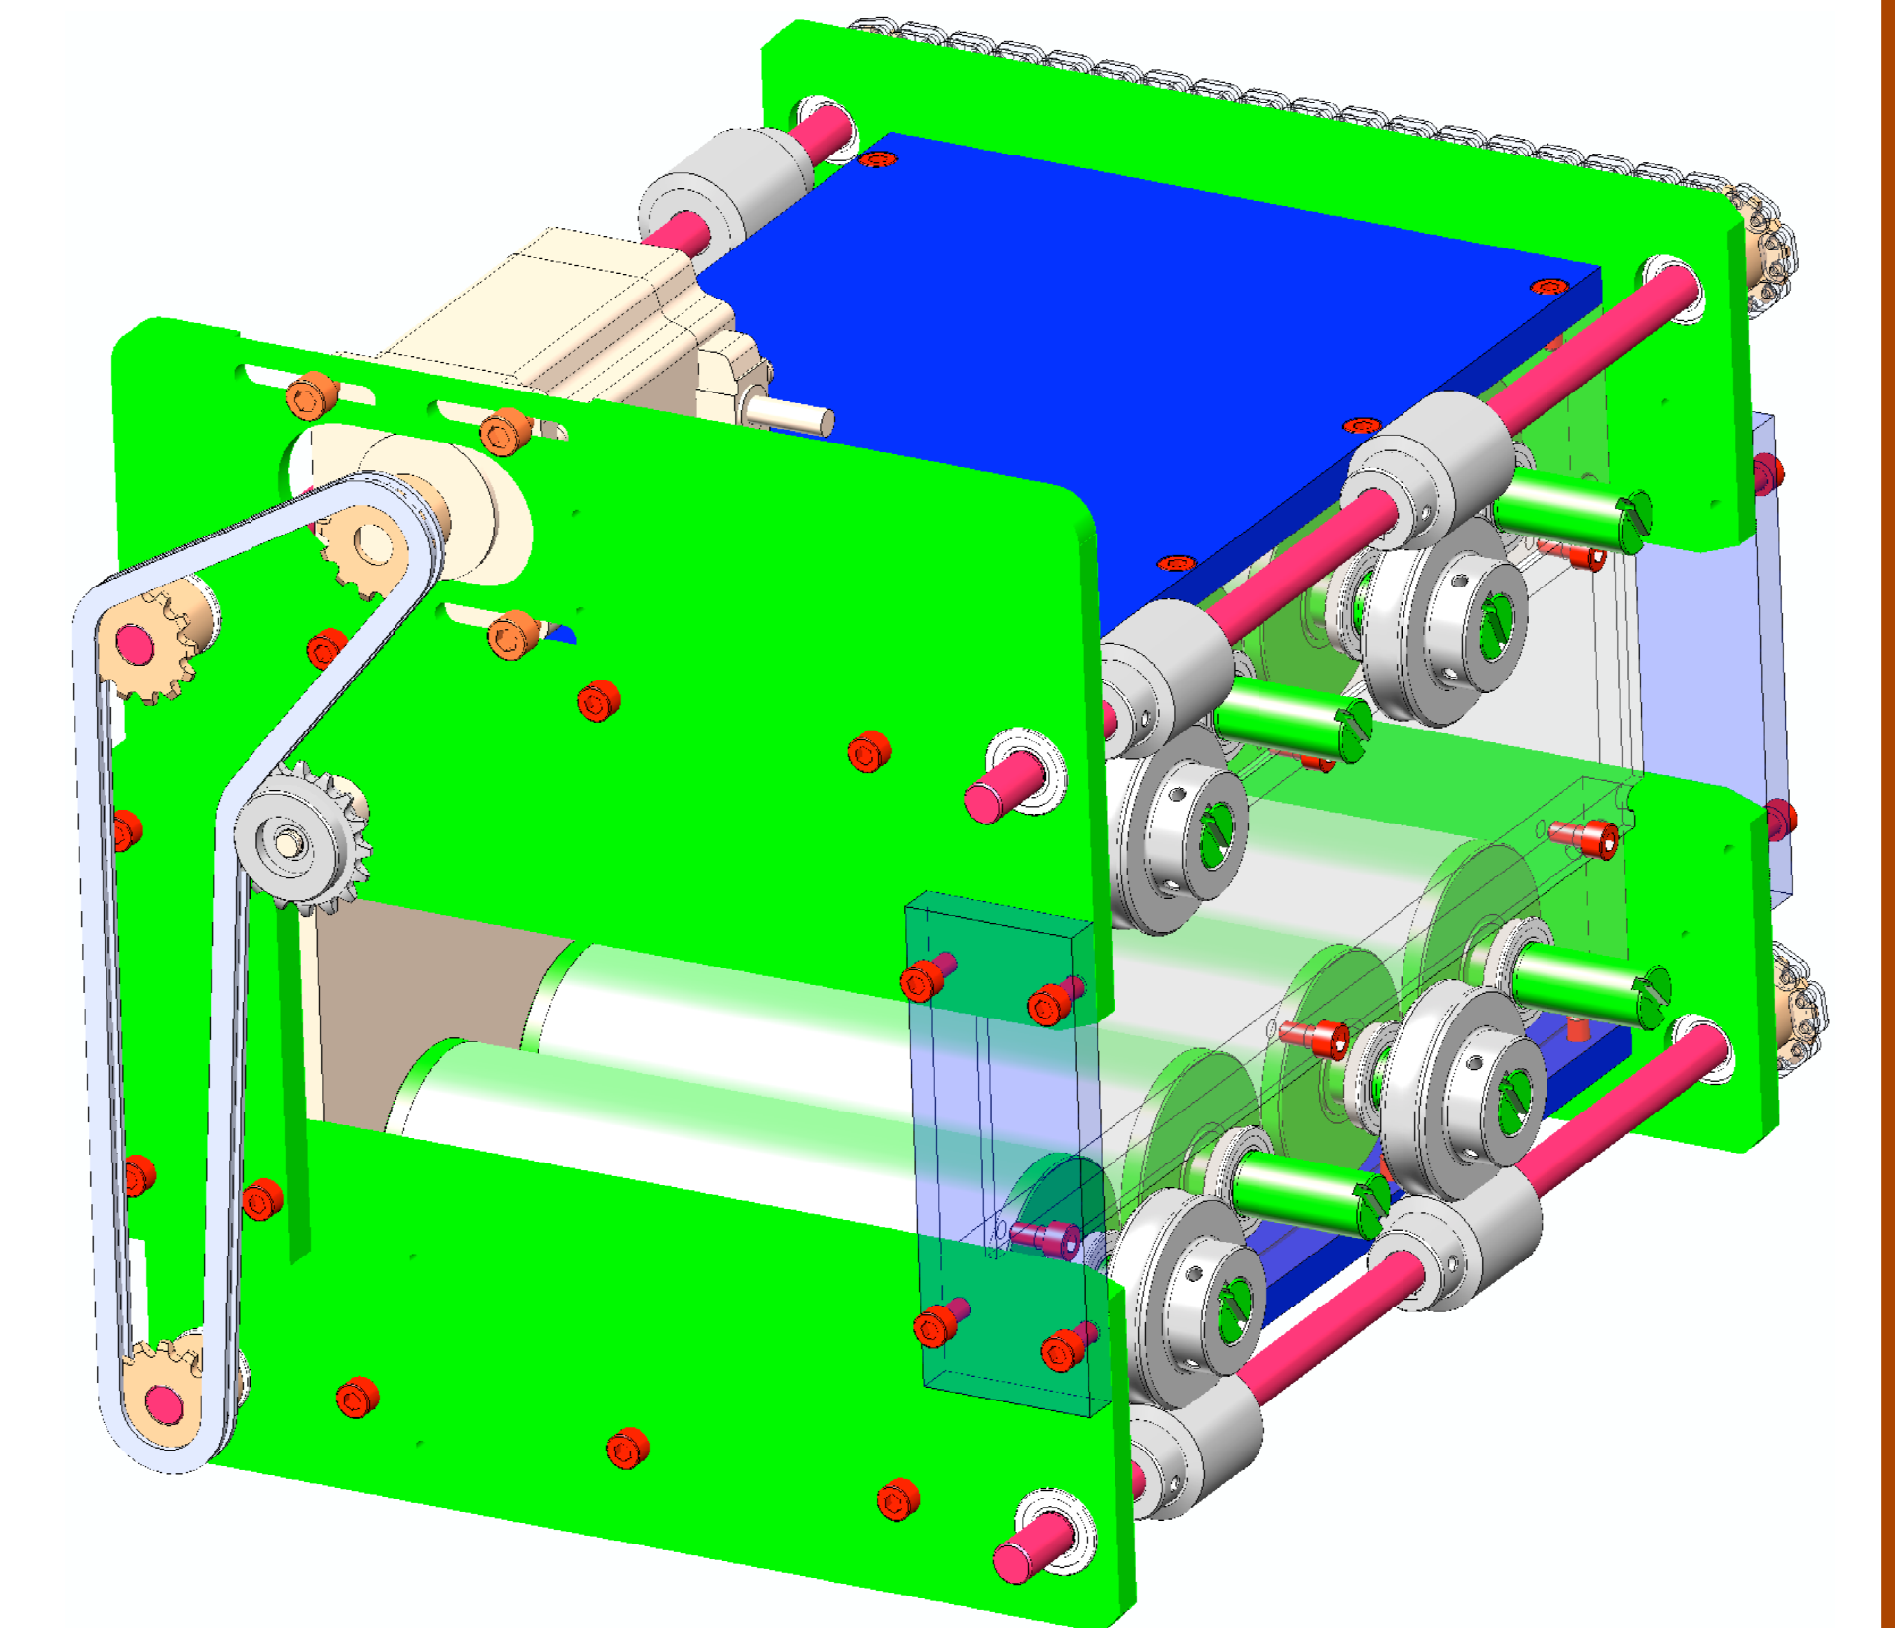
Possible practical design for the double unit configuration. The pulse motor drives four shafts, which drive the rotors. One of the magnet side could be opened without mechanical disassembly of the rotors for conveniences of installation to beamlines. More units can be lined up according to each strength requirement.
